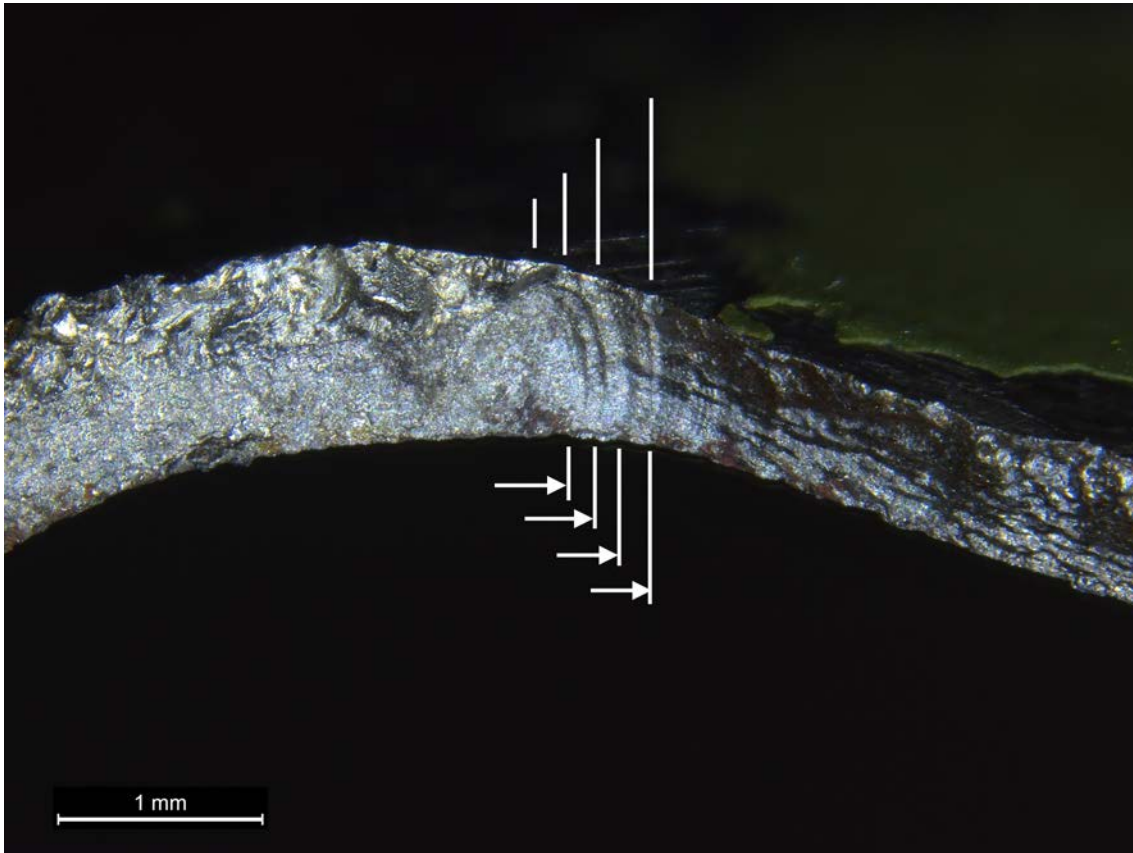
Fracture surface detail of the stabiliser mount (view looking outboard) with locations of previous weld repair identified
